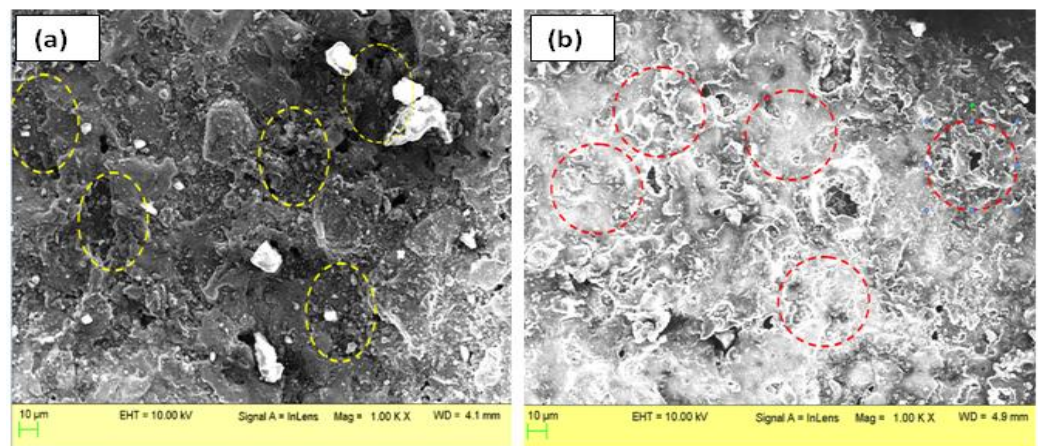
Scanning electron microscope (SEM) analysis of workpiece after machining (a) Al-37% SiC shows ablation mechanism of material removal; (b) Al-63% SiC shows melting as the dominating material removal mechanism.
